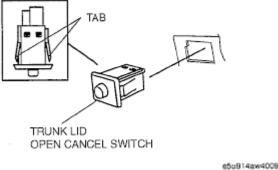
Identifying Trunk Lid Opener Cancel Switch And Tab Courtesy of MAZDA MOTORS CORP.
